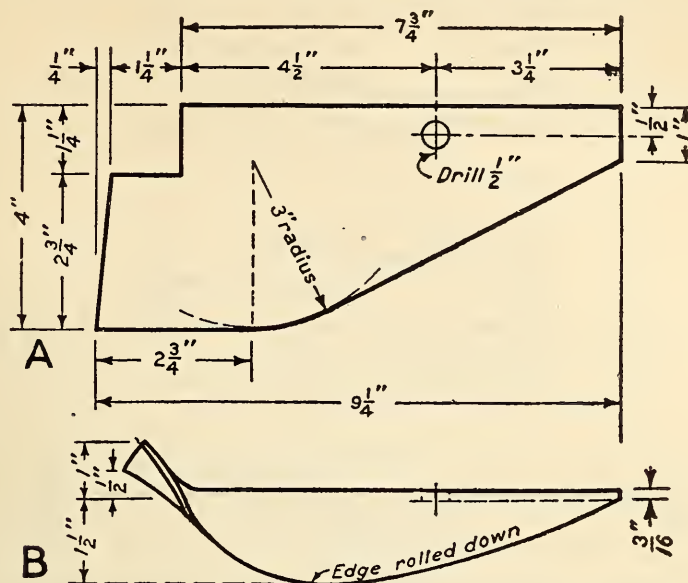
Elevating chute, Massey-Harris corn binder
